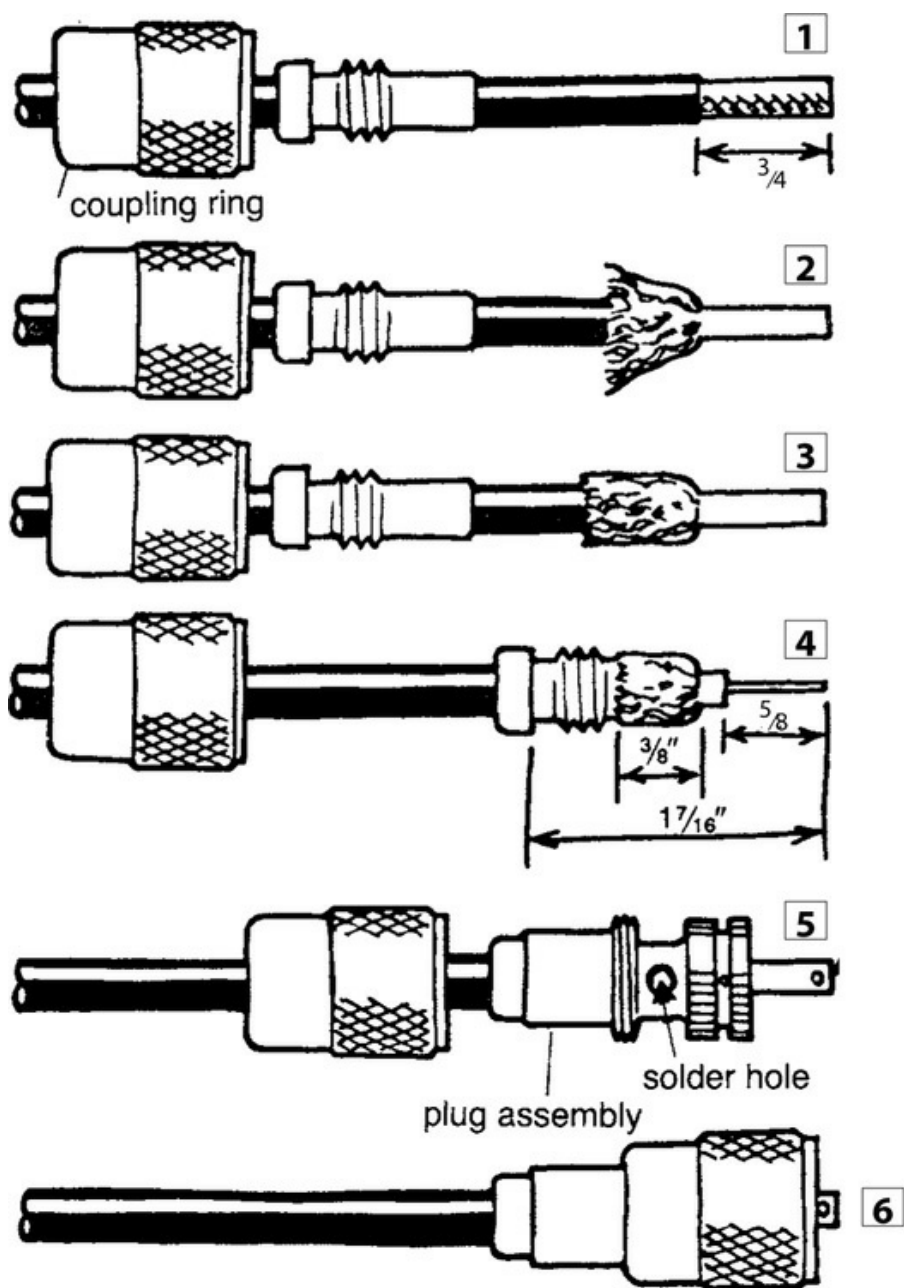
B. Method of installing coax connectors with adapters (RG-58U,
